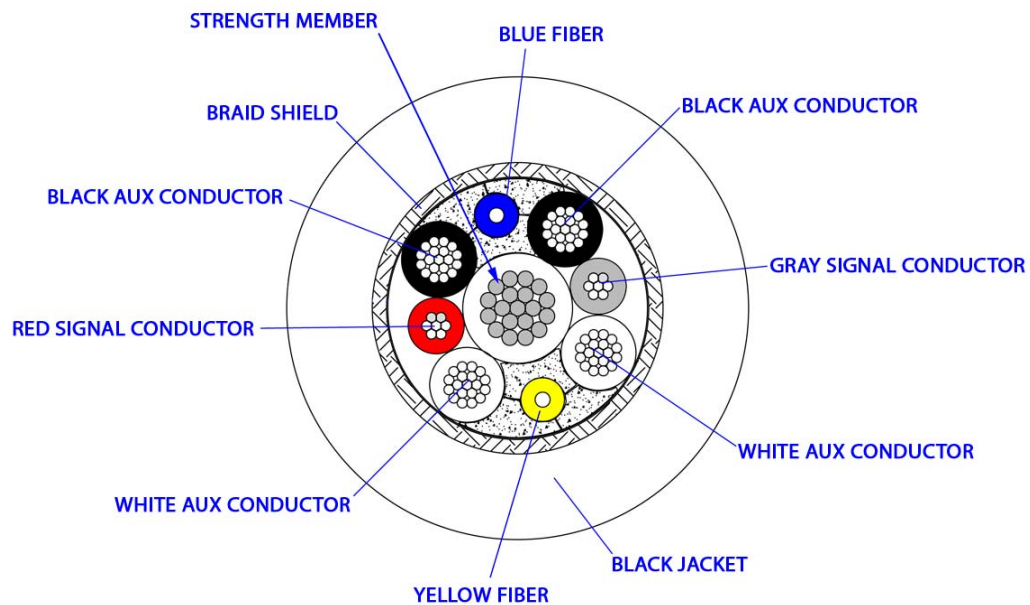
Configuration for 4 auxiliary conductor cable types (Plug end)
